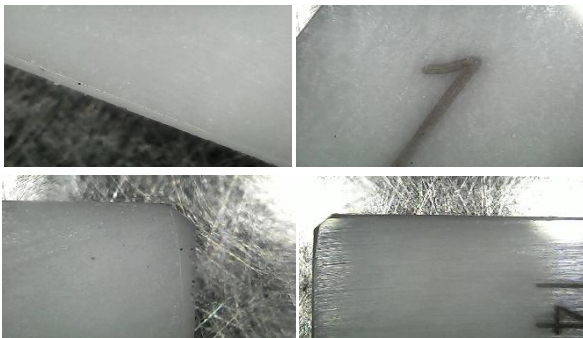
Visual inspection of the surface of gauge blocks
